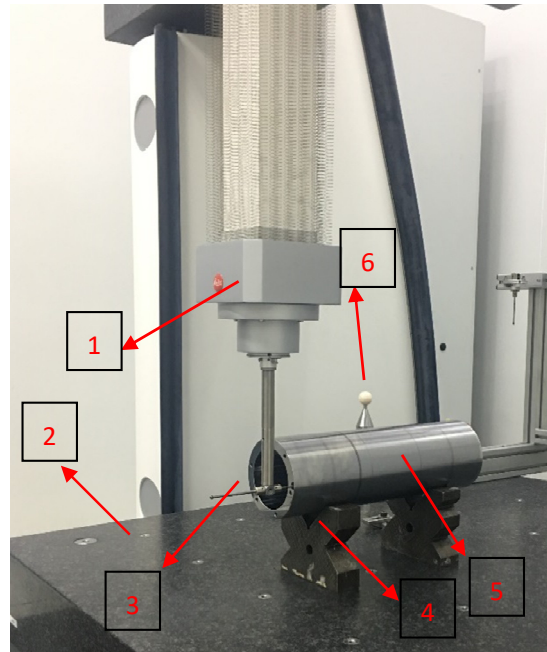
Inspection site of motorized spindle. 1—telescopic probe; 2—workbench; 3—probe; 4—V block; 5—motorized spindle part; 6—school team coordinate system.
